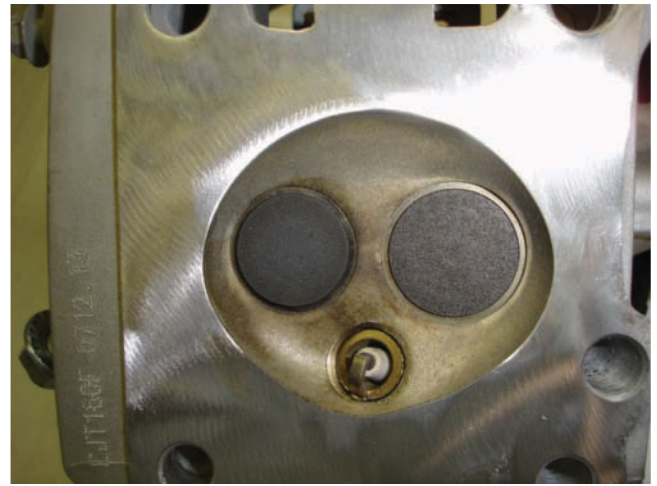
Power equipment engines are generally of the 2-valve design, which includes one intake valve and one exhaust valve.
